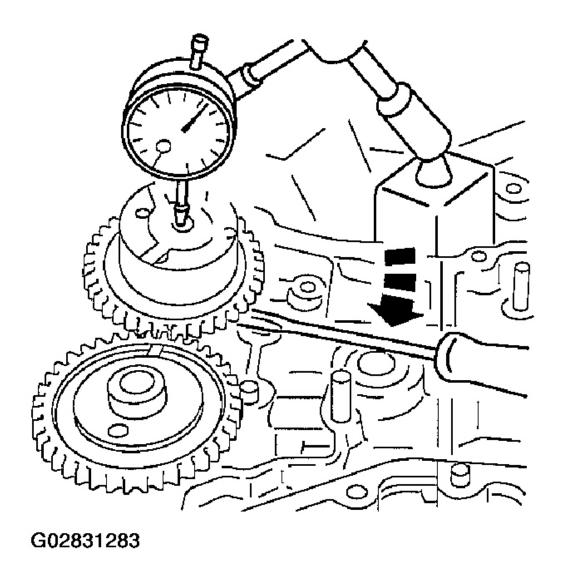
Measuring Camshaft End Play Courtesy of MAZDA MOTORS CORP.
